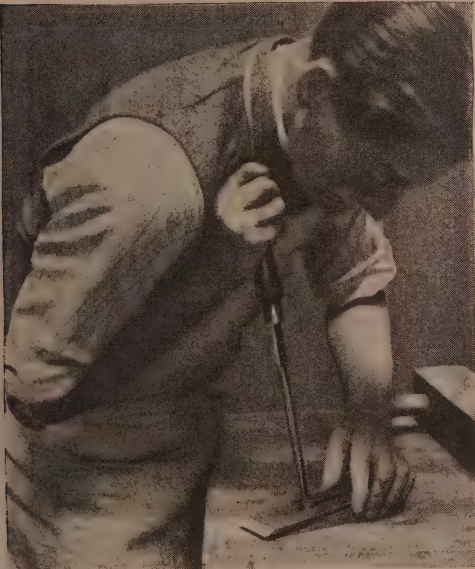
Unscrewing Plane Irons by using Plane Wedge
